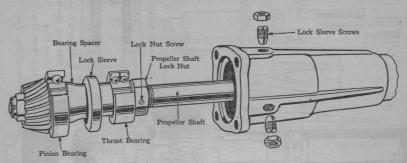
Removing Propeller Shaft, Model Four-Ninety (with Spiral Gears) and Superior.
